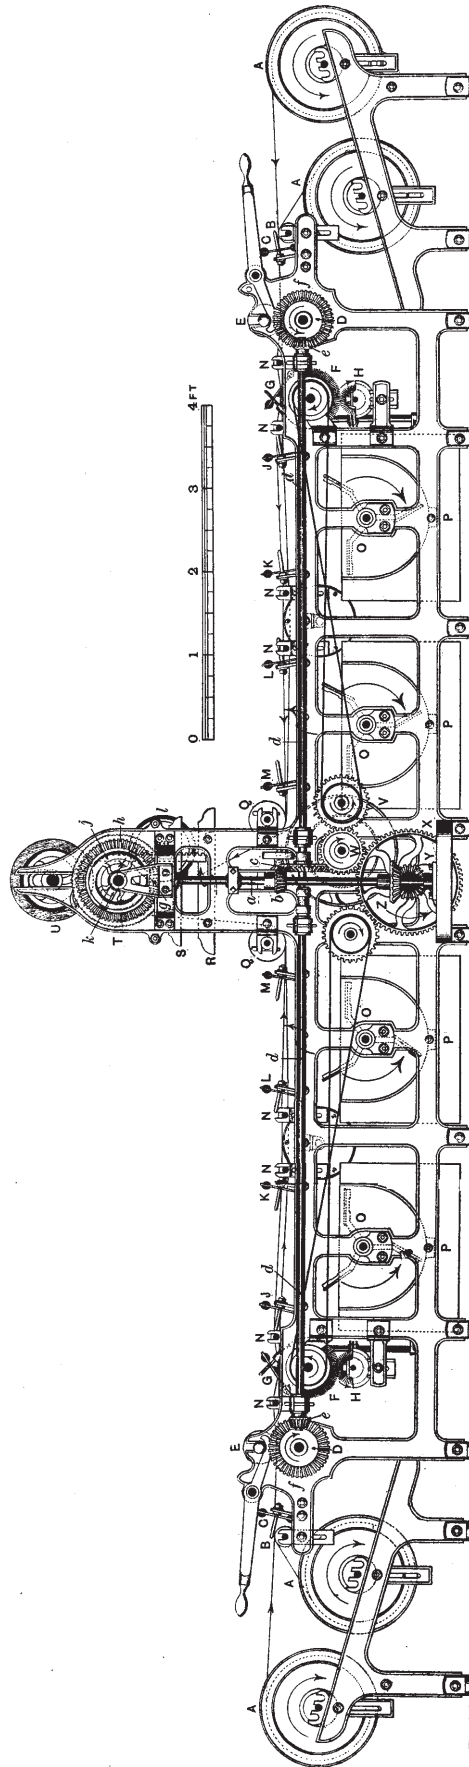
SCOTCH OR LINEN DRESSING OR SIZING MACHINE.
